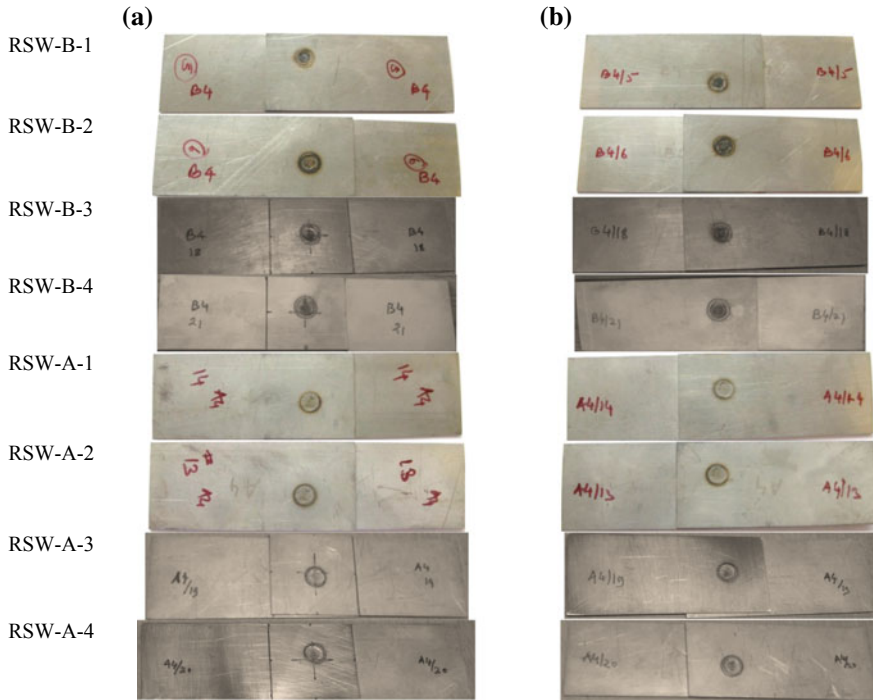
Appearance of the resistance single-spot welded samples showing weld nugget from a top and b bottom
